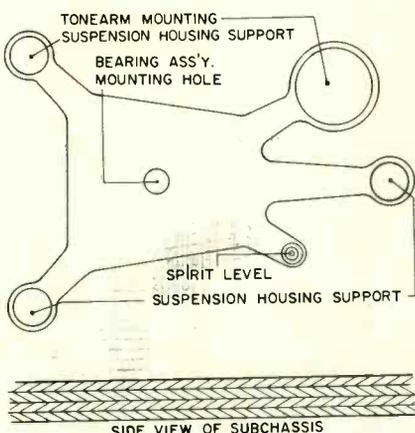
Side and top views of the subchassis show the unusual design and construction.
